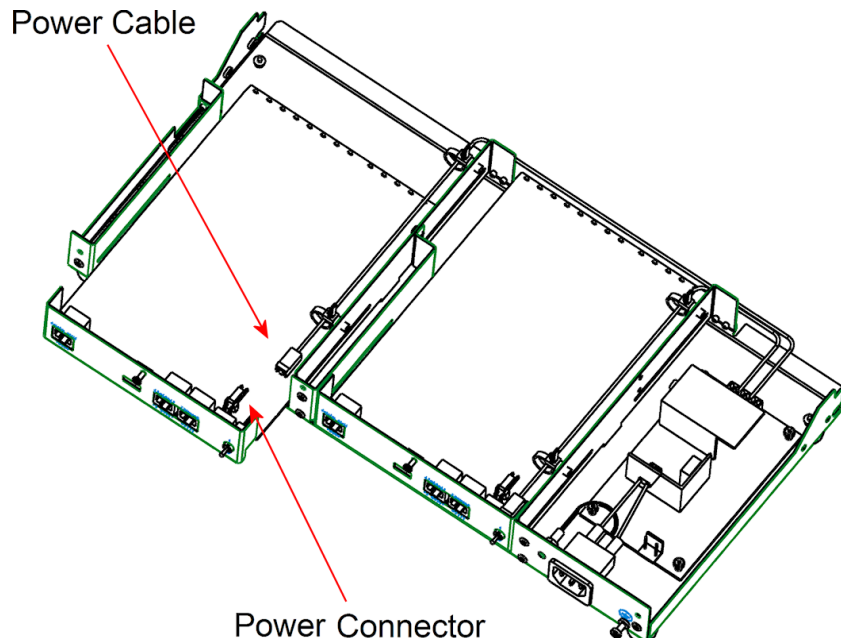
MVP2410/3010 Chassis (top/rear view)
